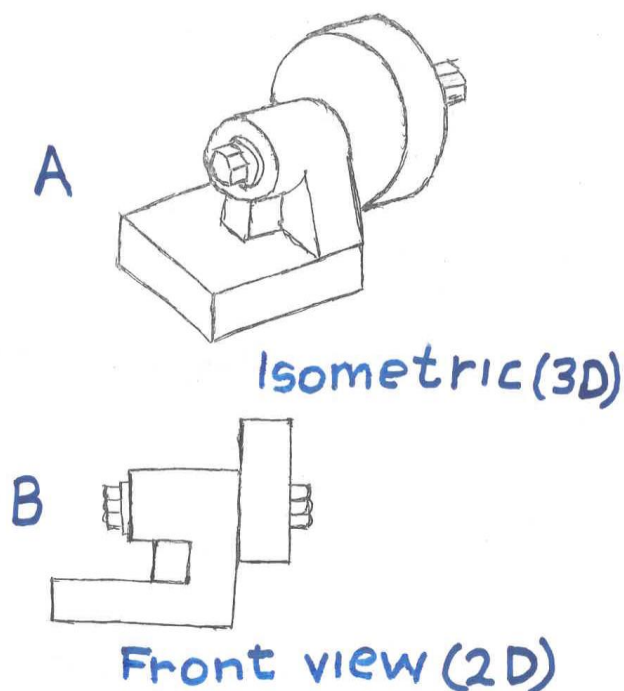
Freehand isometric drawing (A) and front view of orthographic projection (B)
